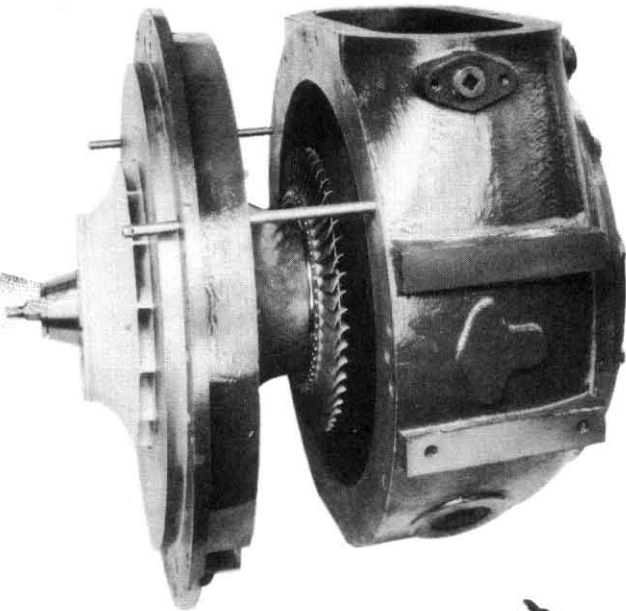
Intermediate and Turbine Casing — Method of Assembly and Disassembly.
